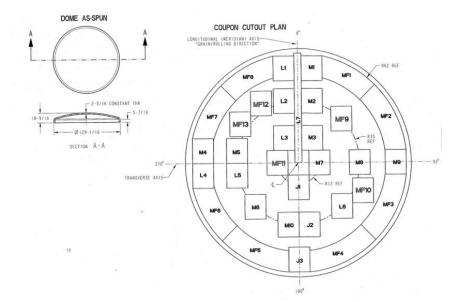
Aft Bulkhead Cut Plan showing the Location of the FSW and FPPW Schedule Development Coupon Blanks
